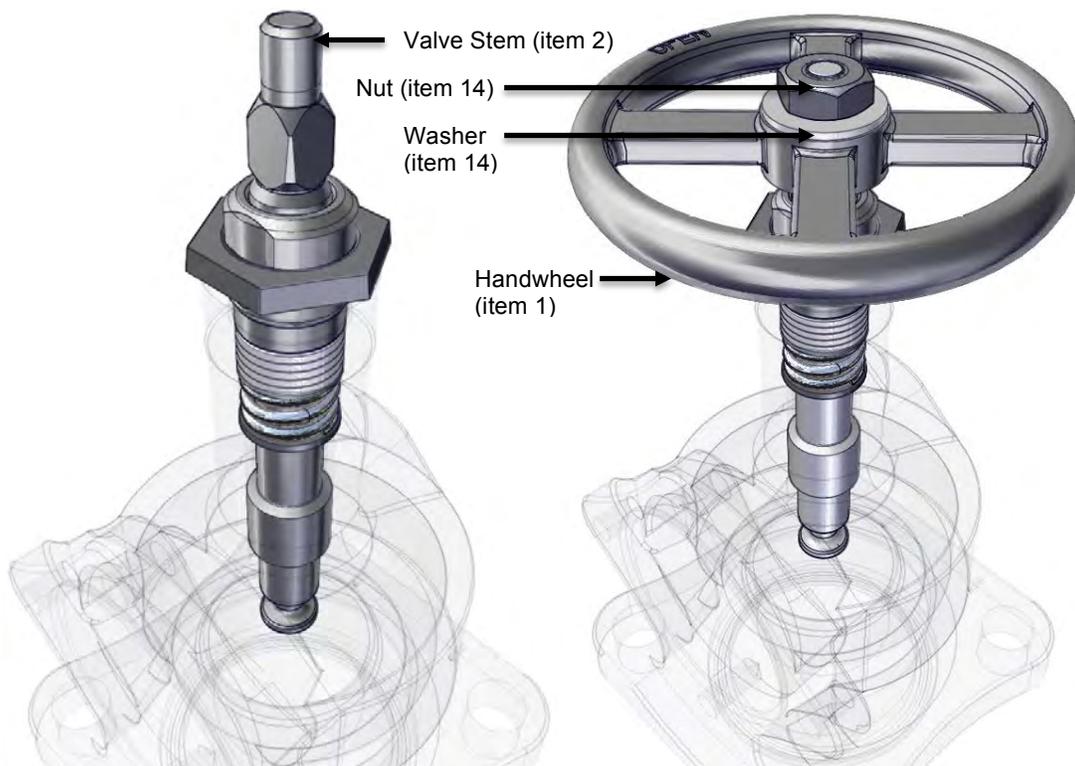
Reassembly Steps 7.2.8 through 7.2.10
